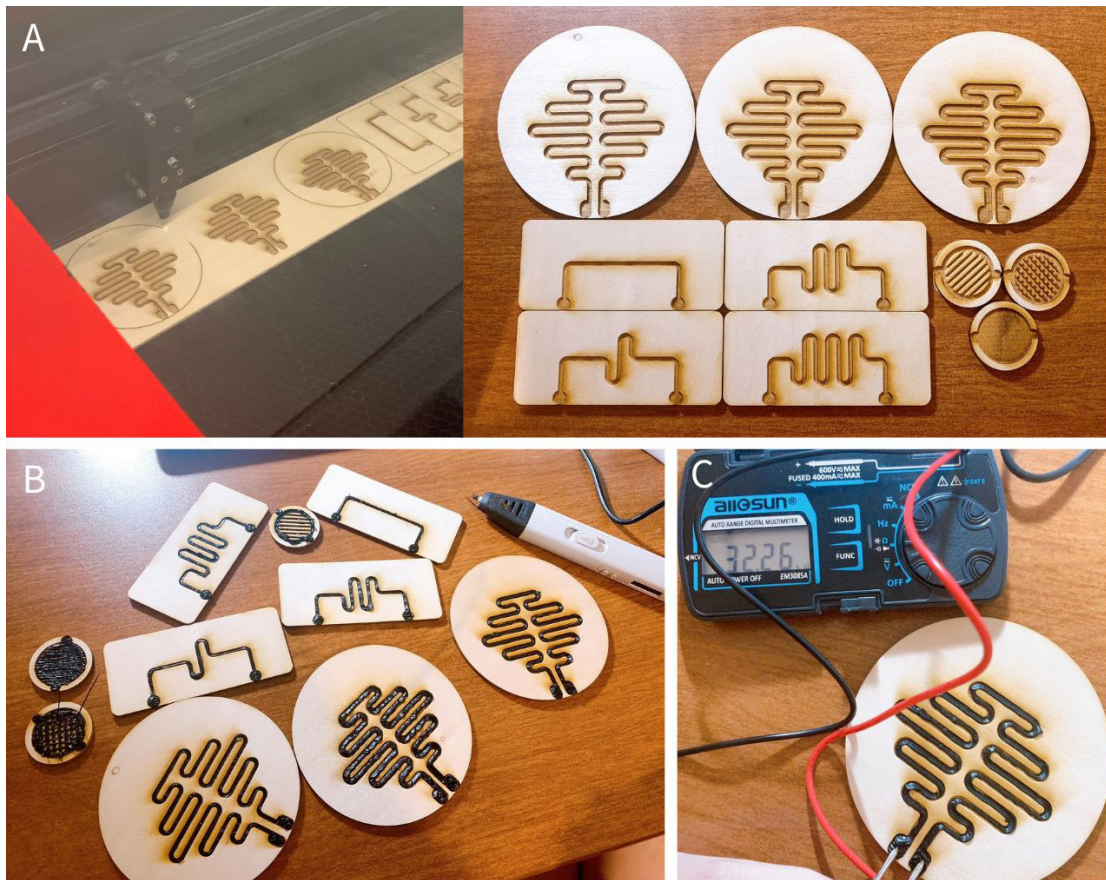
Process of making PoC prototypes. A: Laser cut the base shape and engrave the circuit pattern traces. B: Fill the engraved traces with conductive filament using a 3D pen. C: Check circuit completion and measure resistance with a multimeter.
